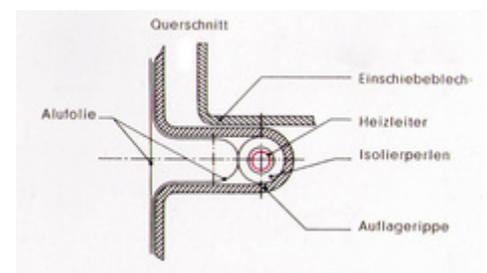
Cross-section through a hollow in the inner chamber, with integrated heating element
